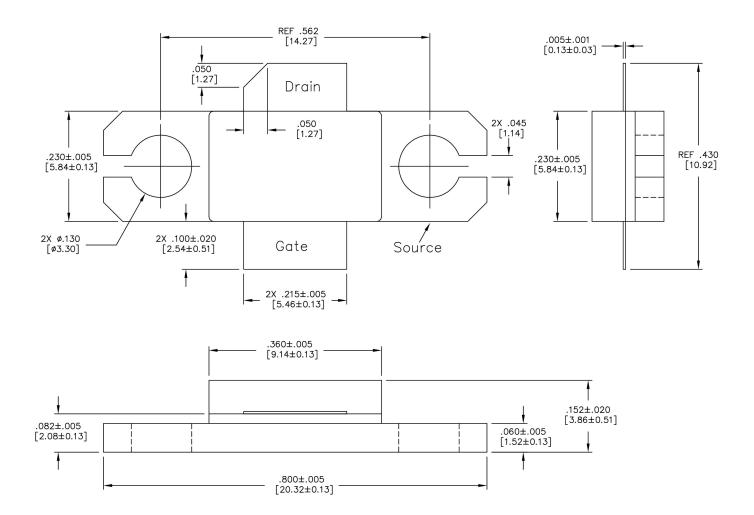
AC360B-2 Metal-Ceramic Package Dimensions (all dimensions in inches [millimeters])
